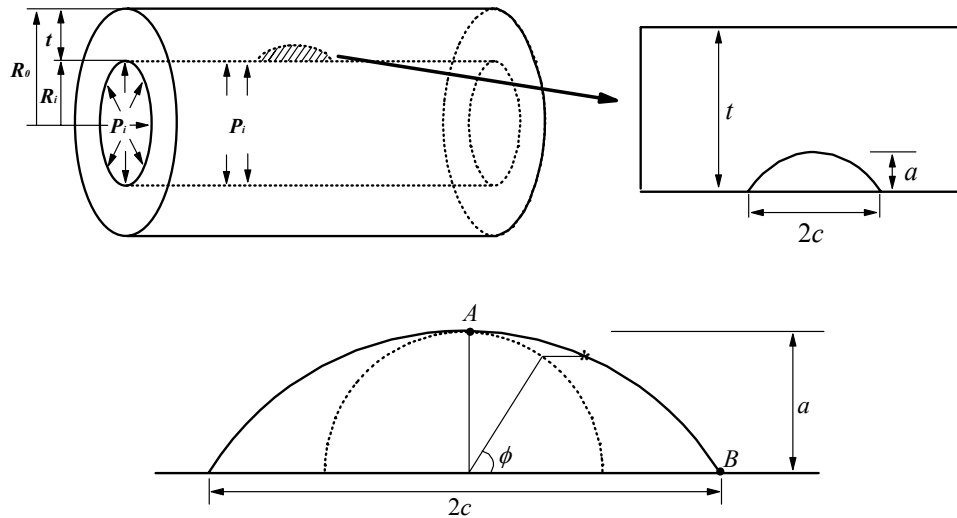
Geometry of an elliptic surface crack located in the radial-axial plane on the internal surface of a thick wall cylinder (R_i = inner radius, R_o = outer radius, t = thickness, a = crack depth, c = half crack length, P_i = internal pressure).
